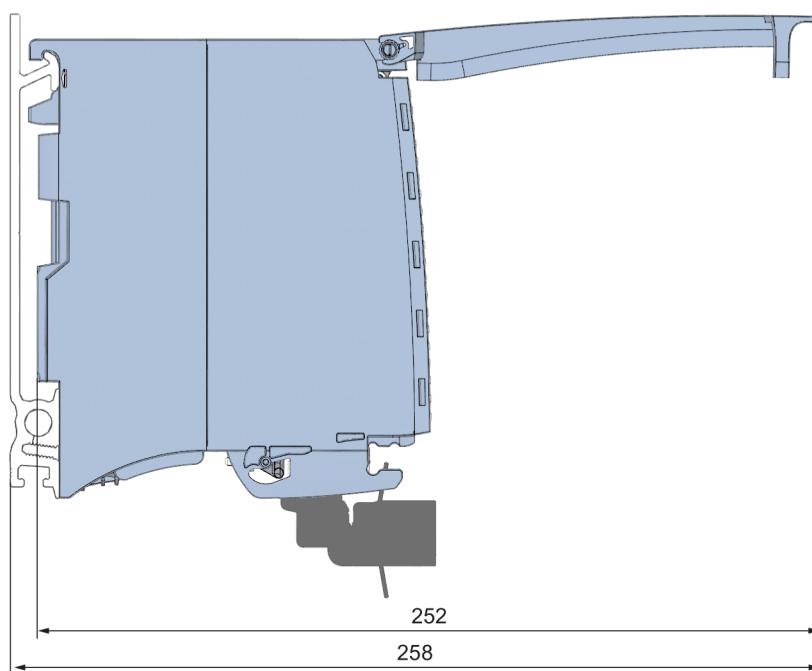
Dimensional drawing of the AQ 4xU/I ST module, side view with open front panel
